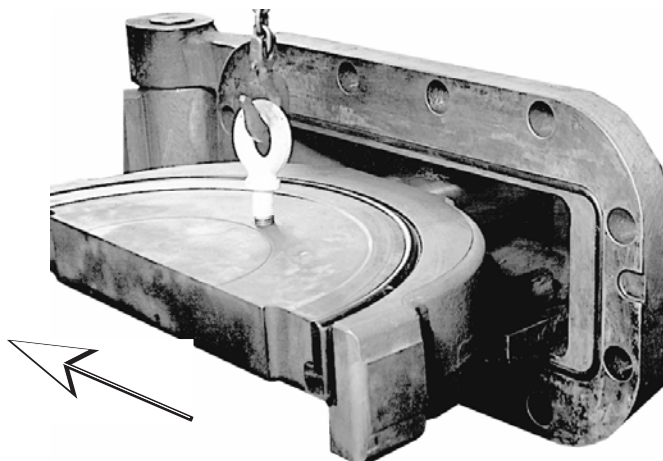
Install Eyebolt and Slide Ram Horizontally
